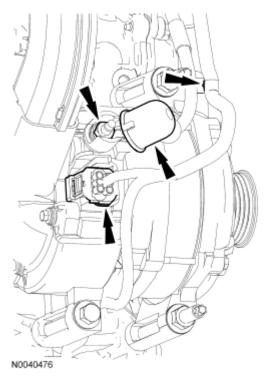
Locating Generator Splash Shield And Nuts Courtesy of FORD MOTOR CO.
